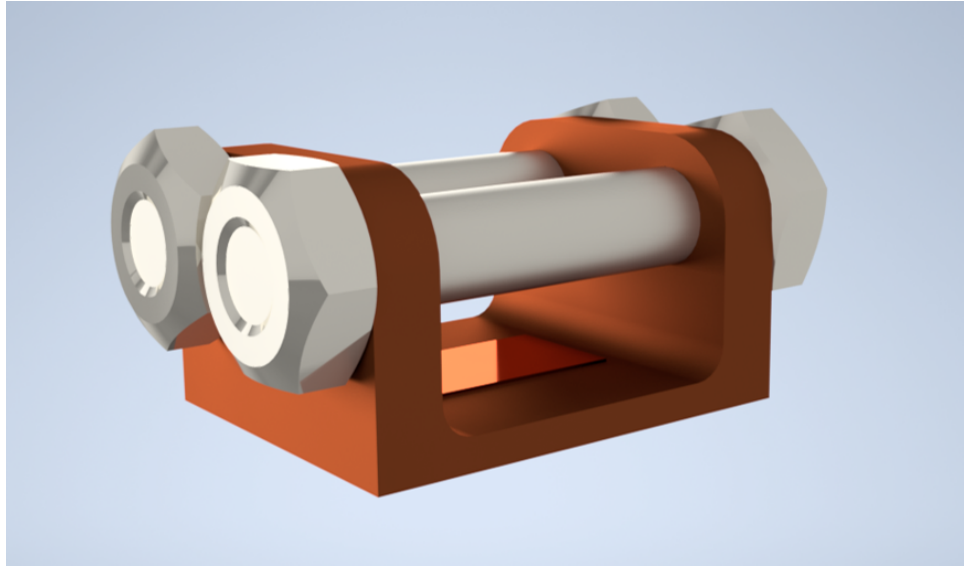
CAD drawing of the miniature strain board design. The Berylco component is 14×11 mm on the base and 8 mm tall, and the strain is applied by tightening the nuts on the threaded rods.
